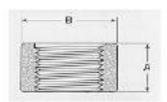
shows various types of couplings, full or half, which are primarily used to make an attachment between a 38-mm (1-1/2 in.) or smaller diameter pipe and a larger diameter header. A coupling is also sometimes used to connect two small diameter pipe sections, rather than butt welding them together.
